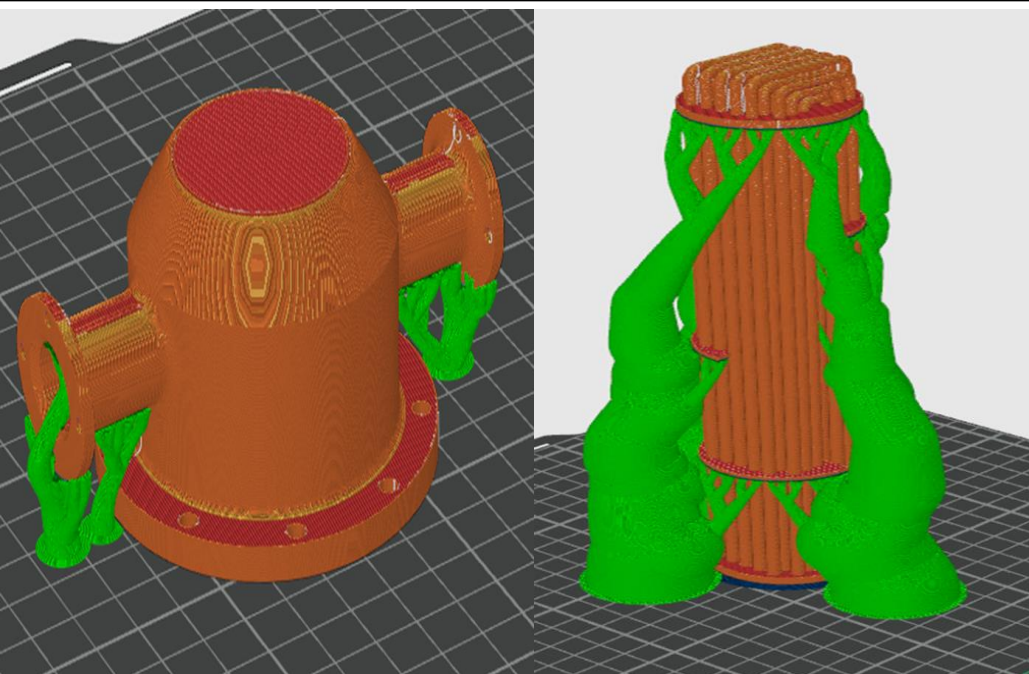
Inlet/Outlet End Cap in 3D Printing Slicer
